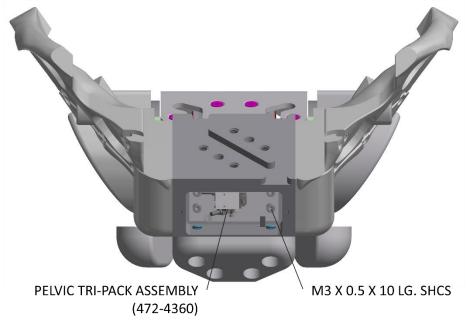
Pelvic Tri-Pack Assembly Mounted in Pelvis
